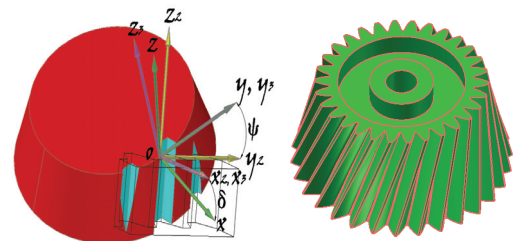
The geometrical morphology of helicalconical gear and 3D model
